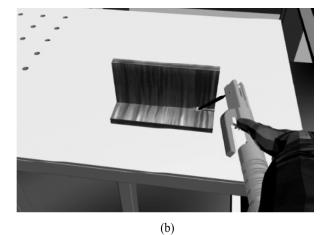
(a) Virtual Reality Welding Platform (b) Enlarged view of workpiece model in virtual environment
